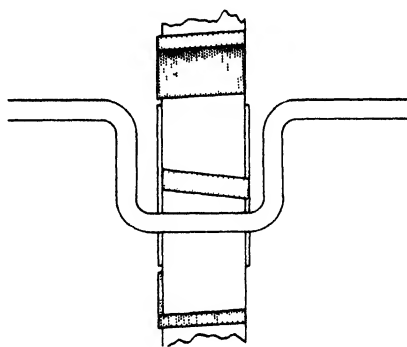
Brazing of Tips to Cutter Bodies by Means of An Induction Coil
